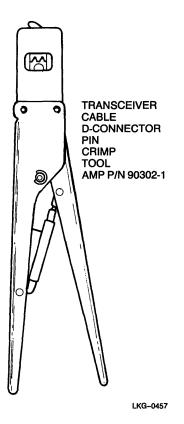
Transceiver Cable D-Connector Pin Crimp Tool
